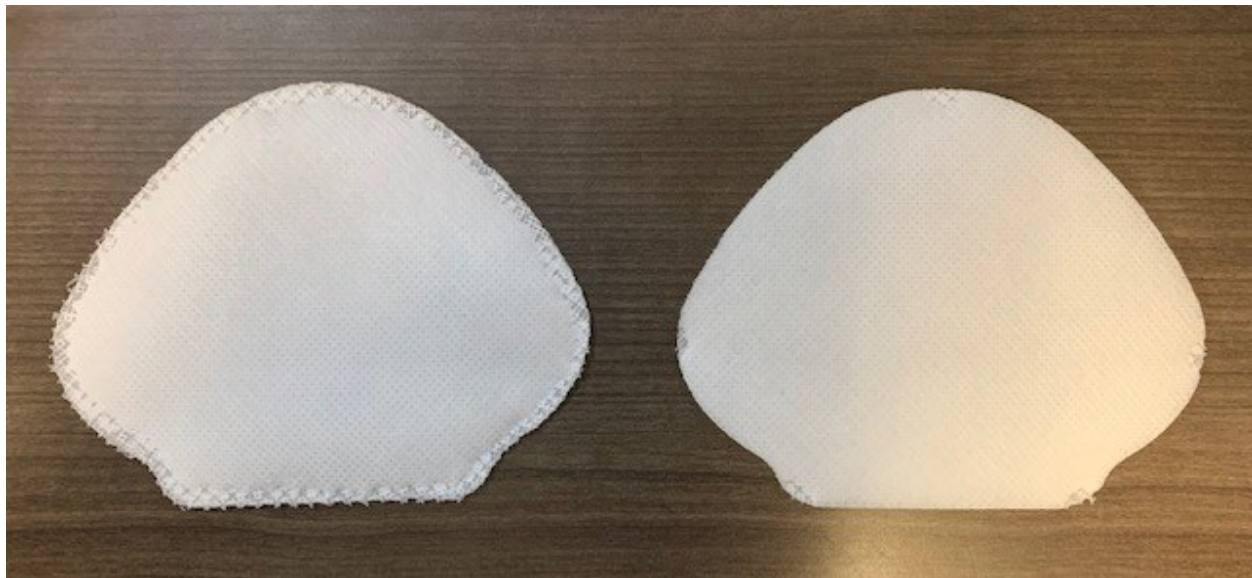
Sonic welded (left) and spot welded (right) bioaerosol filters
